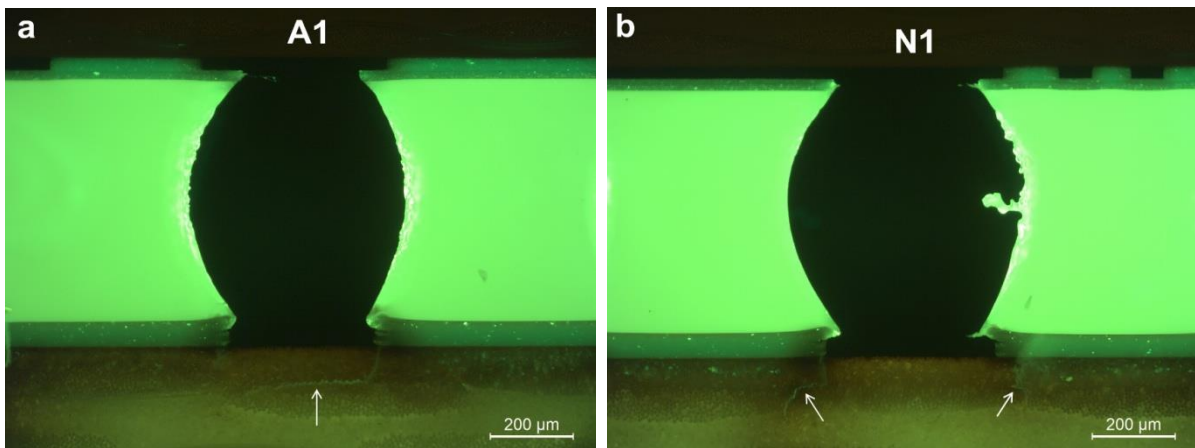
Cross-sections of solder joints a) A1 and b) N1 in the outer row of solder joints to a BGA676 with SAC305 solder joints showing cracks in the PCB laminate.
